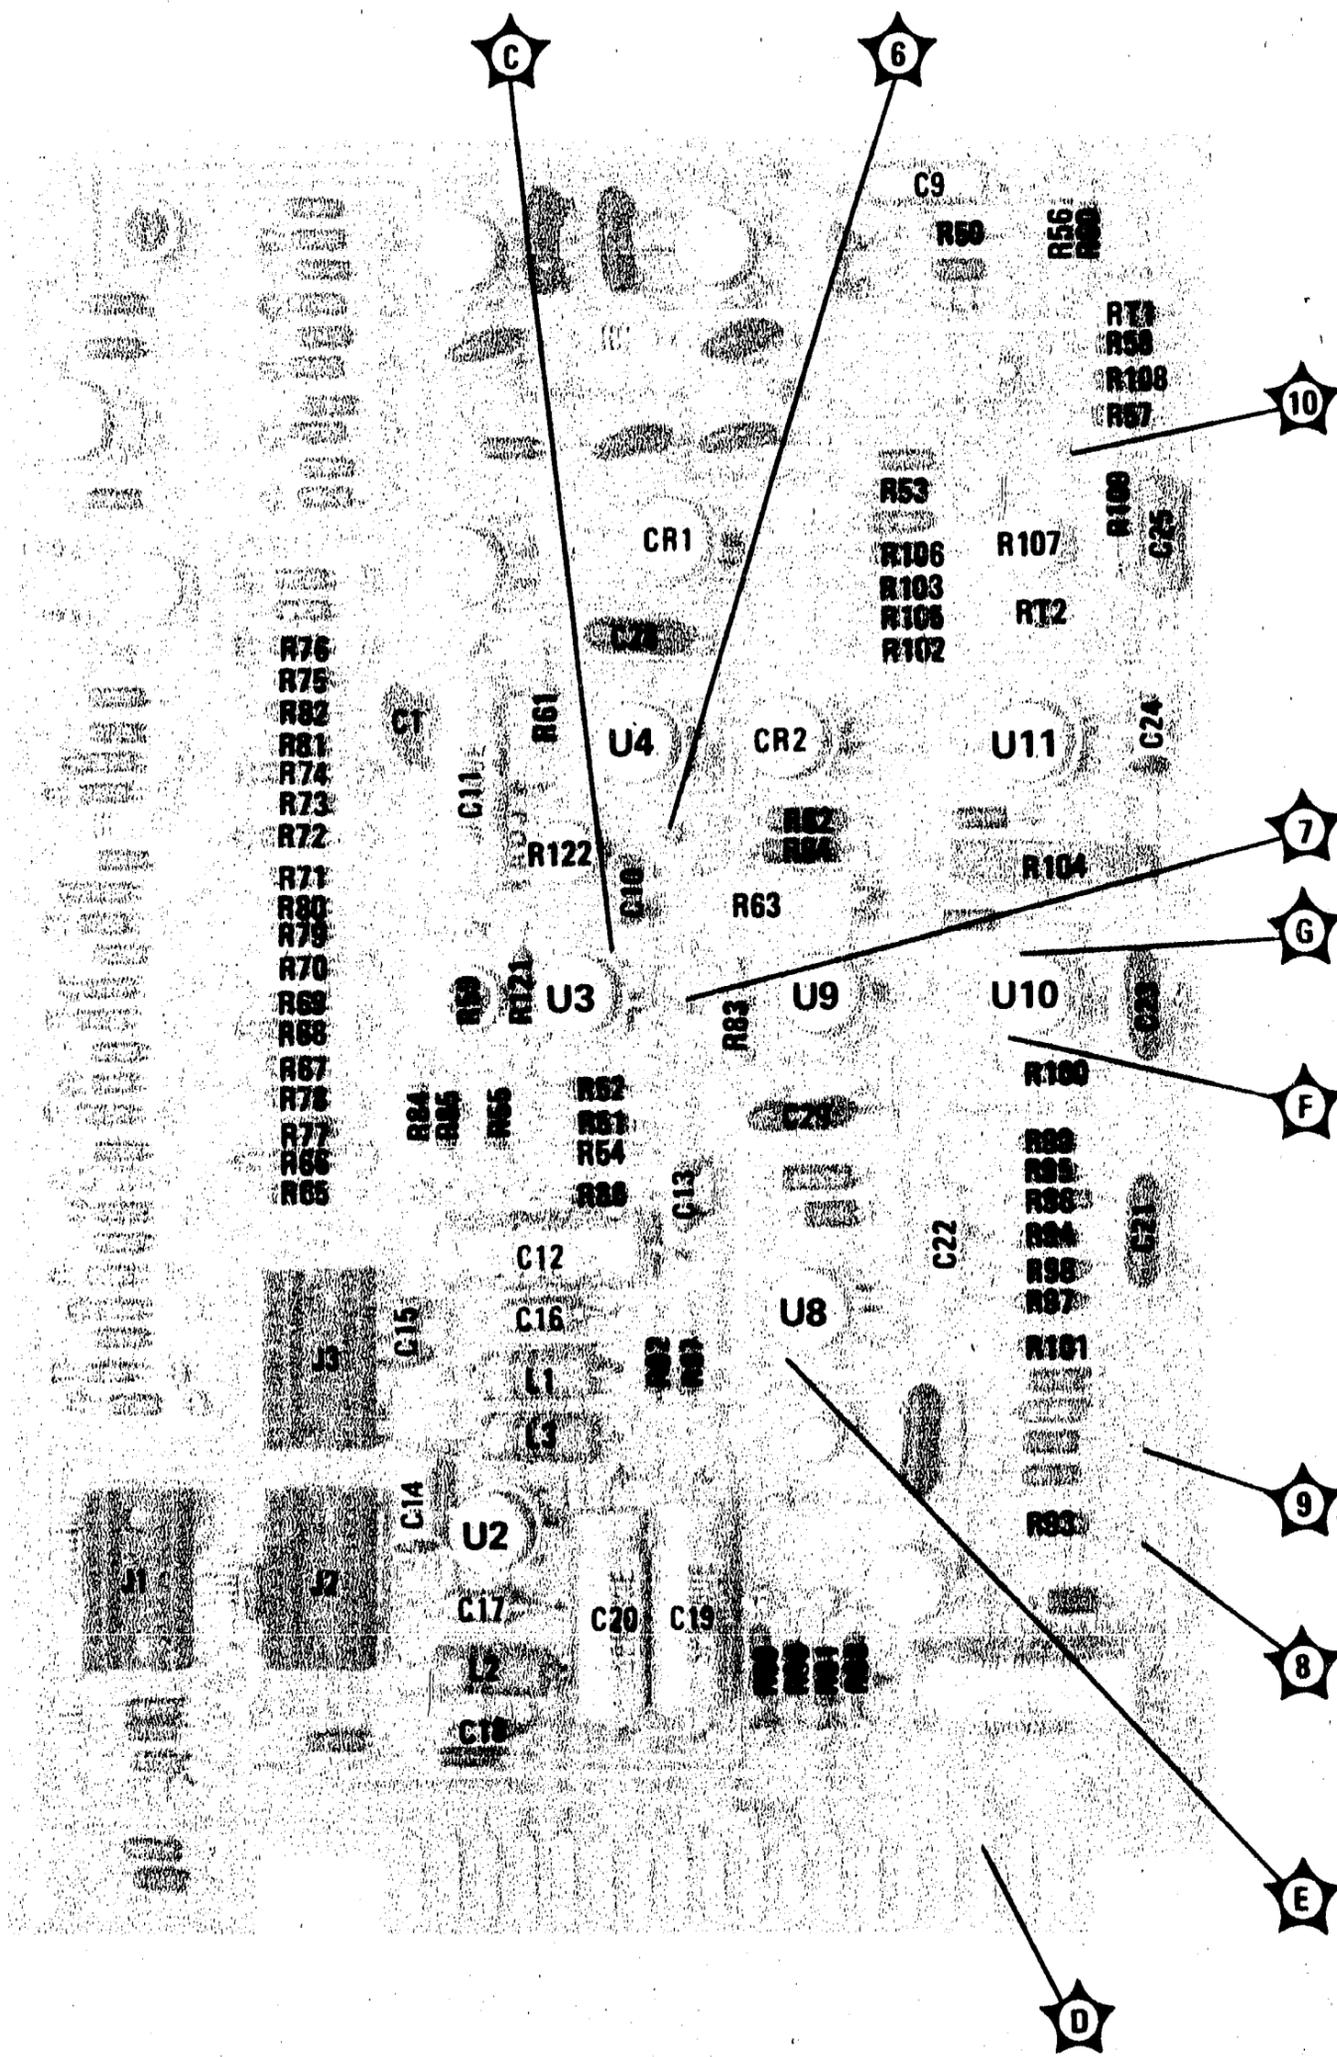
P/O A5 FM Driver Board Assembly Component Locations Backdating (Change D)
